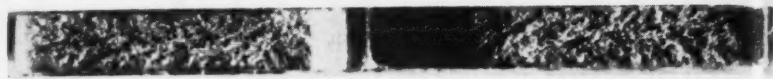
Fracture surface of center-cracked specimen broken in tensile machine below its transition temperature. Chevron markings on the brittle-fracture surface point toward the initial center crack. (9X)
